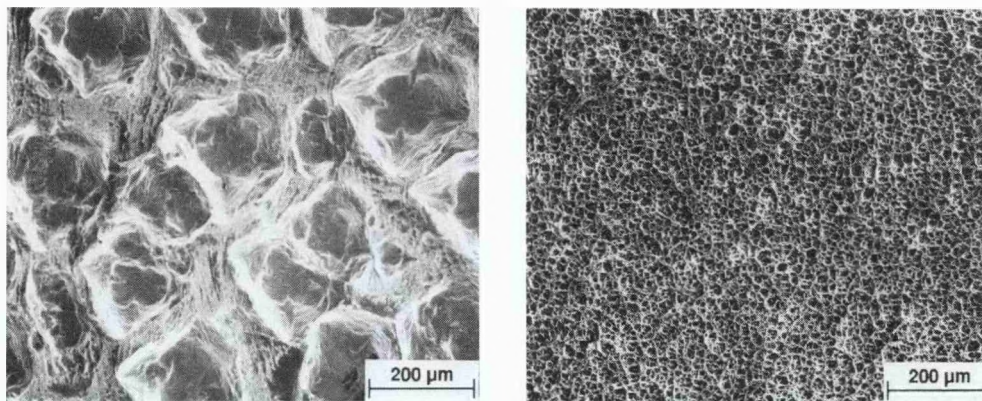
The typical silver/silver SEM fracture surface for bonds in which the maraging (elastic) base metal surfaces were (a) machined (applied stress = 241) and (b) lapped prior to coating (applied stress = 758).
